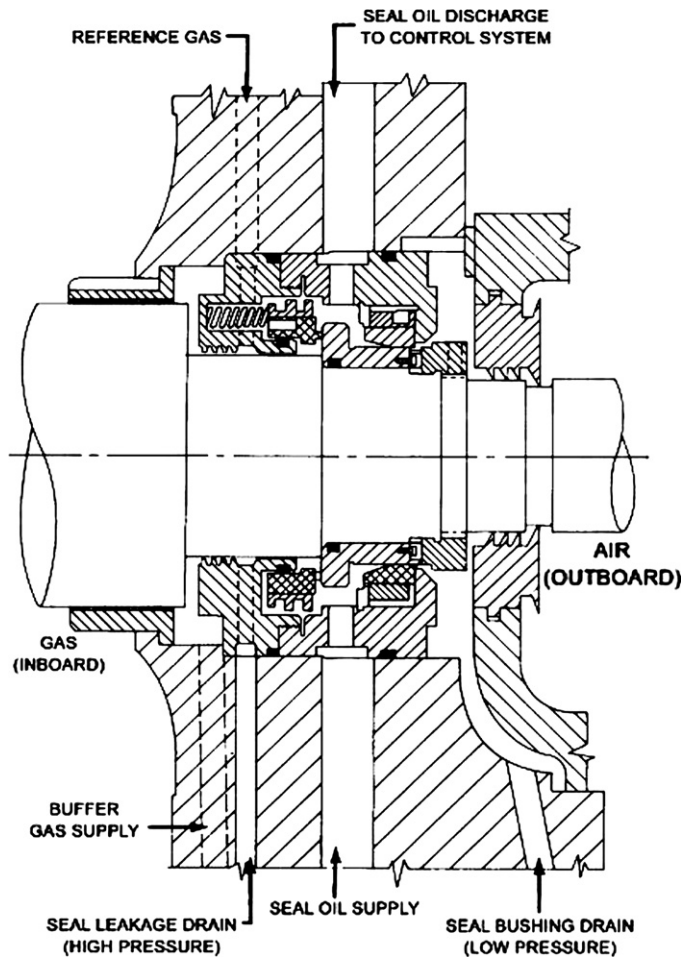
• Compressor shaft seal (Courtesy of IMO Industries)
